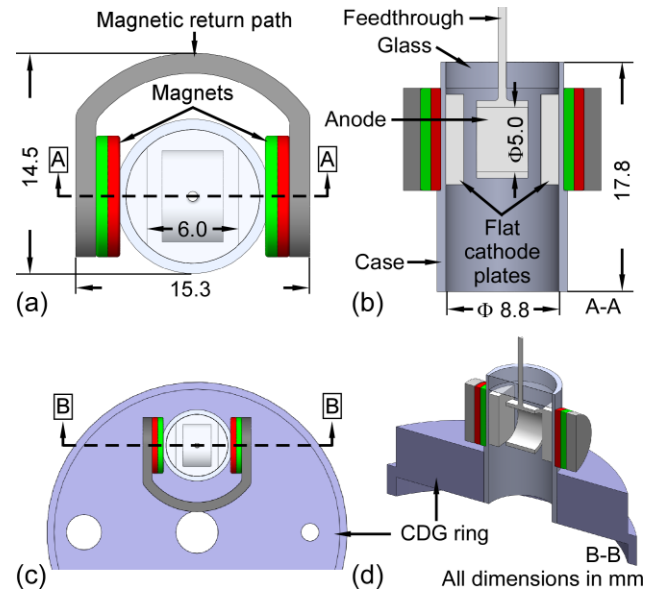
Schematic of Design P.MF.1 geometry (a) 3D, (b) A-A section. Relative position between Design P.MF.1 and CDG ring after assembly (c) top, (d) B-B section.
